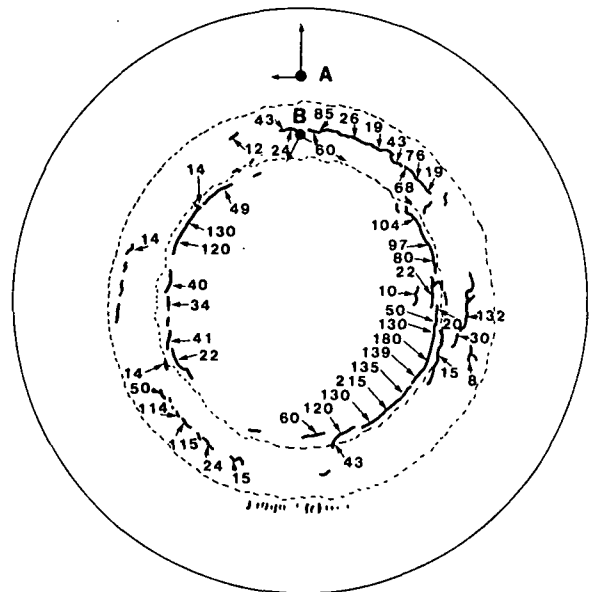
WFMP inspection of an area of the standard control specimen. SCC occurred in both the weld metal and in the weld HAZ.
